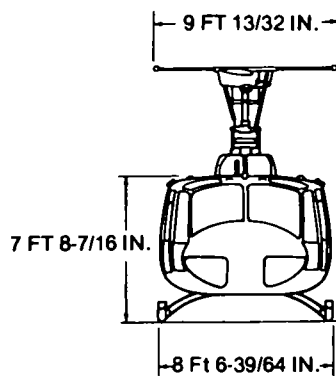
Principal Dimensions, UH-1H (Iroquois)
